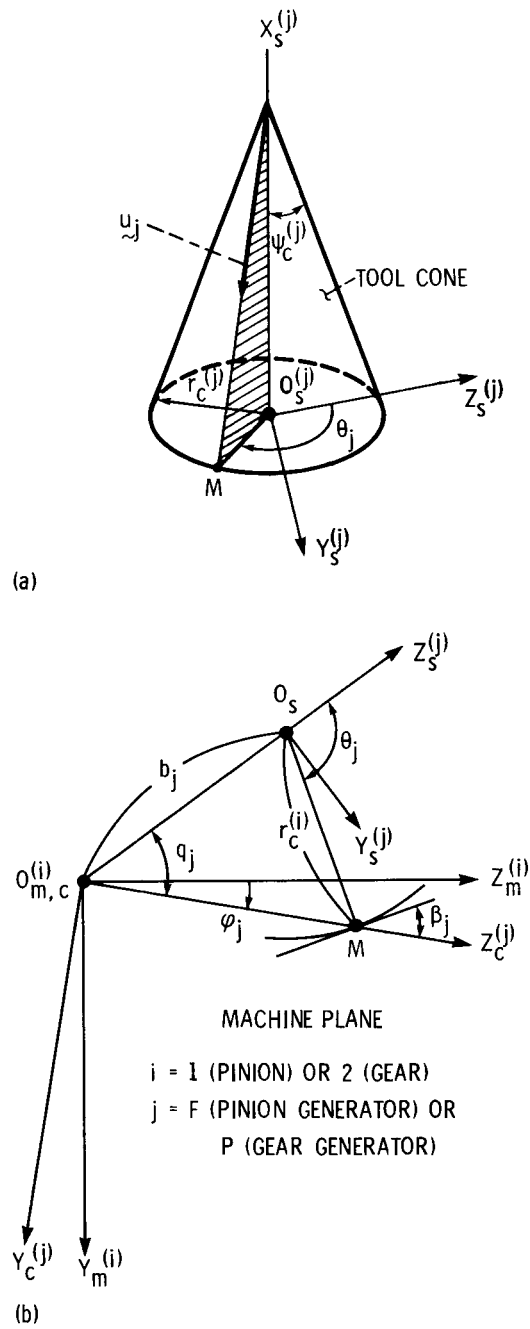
Coordinate system orientation of cutter for spiral-bevel gears with respect to gear-generating machine.
